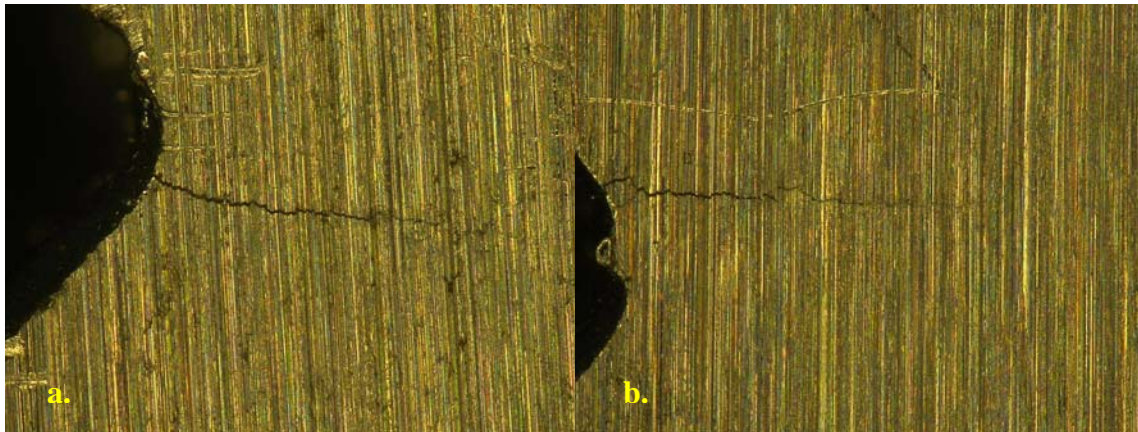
Crack in Specimen #1 (a) front and (b) back faces (magnified x100).
